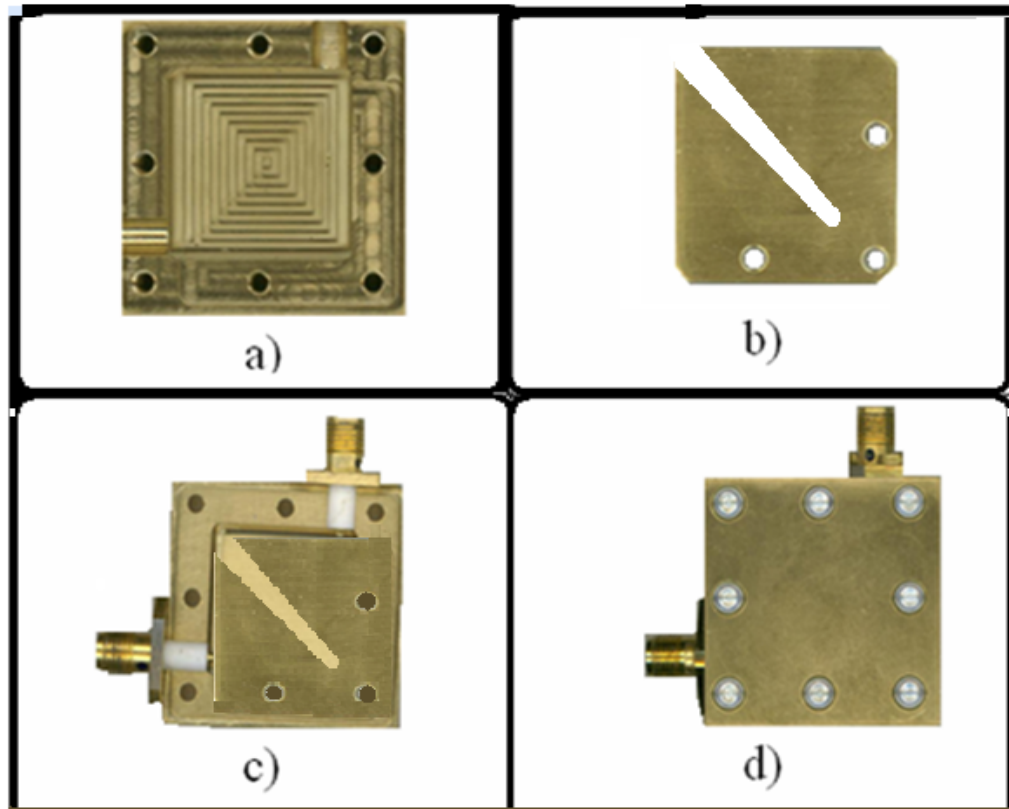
Fabricated 2-pole slotted FWG resonator filter before assembly (a, b and c) and after assembly (d).
